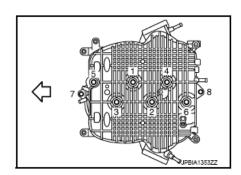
Intake Manifold Collector Mounting Bolts And Nuts Tightening Sequence Courtesy of NISSAN MOTOR CO., U.S.A.
